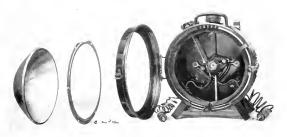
A Portable Interurban Type Headlight with Struck-up Steel Casing and Deep Glass Parabolic Mirror Reflector
